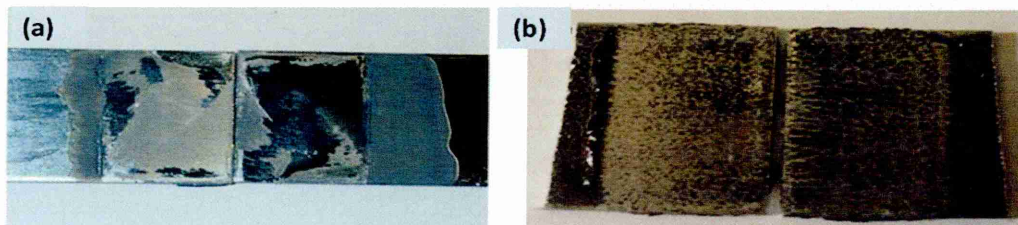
sol-gel adhesive fracture surface modes, a) AD6[#] adhesive mode and b) AD7[#] cohesive mode.
